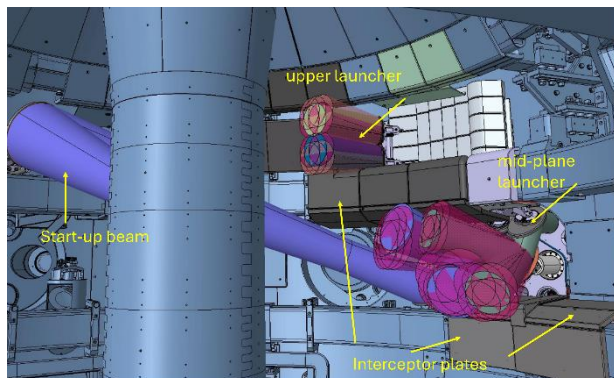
CAD view of the MAST-U EBW In-Vessel Components
